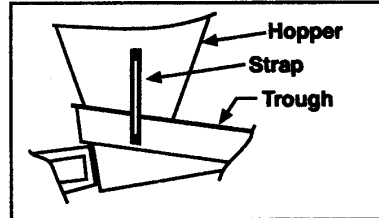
SUPPORT STRAP FOR INSTALLED ASSEMBLY
